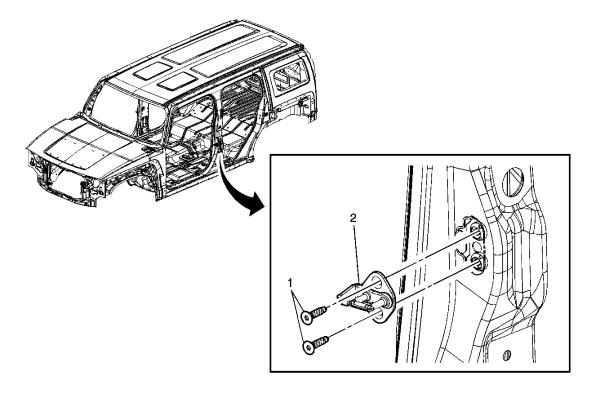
Striker Replacement - Door Courtesy of GENERAL MOTORS CORP.
